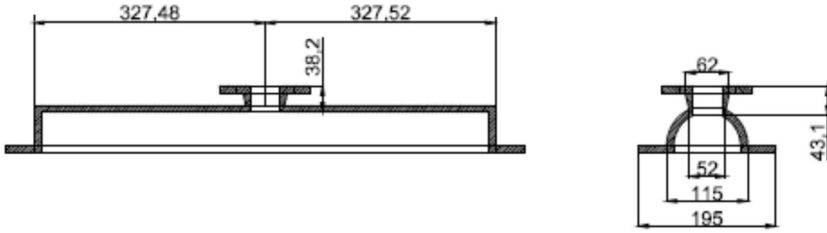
Shape and dimensions of the inlet and outlet heat exchanger headers
